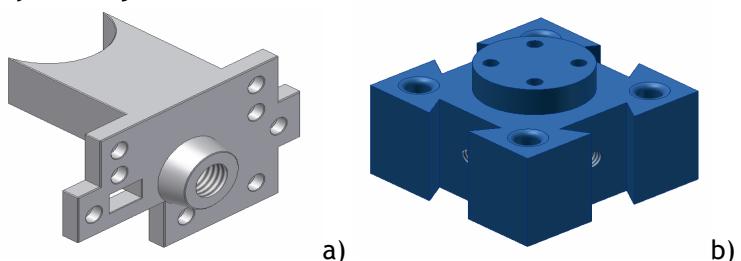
a) Head plate of swivel head, b) Swivel head part
